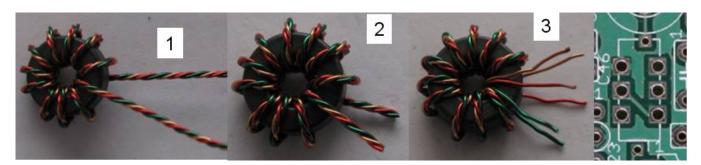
Preparation of T1 and picture of the PCB holes for T1
